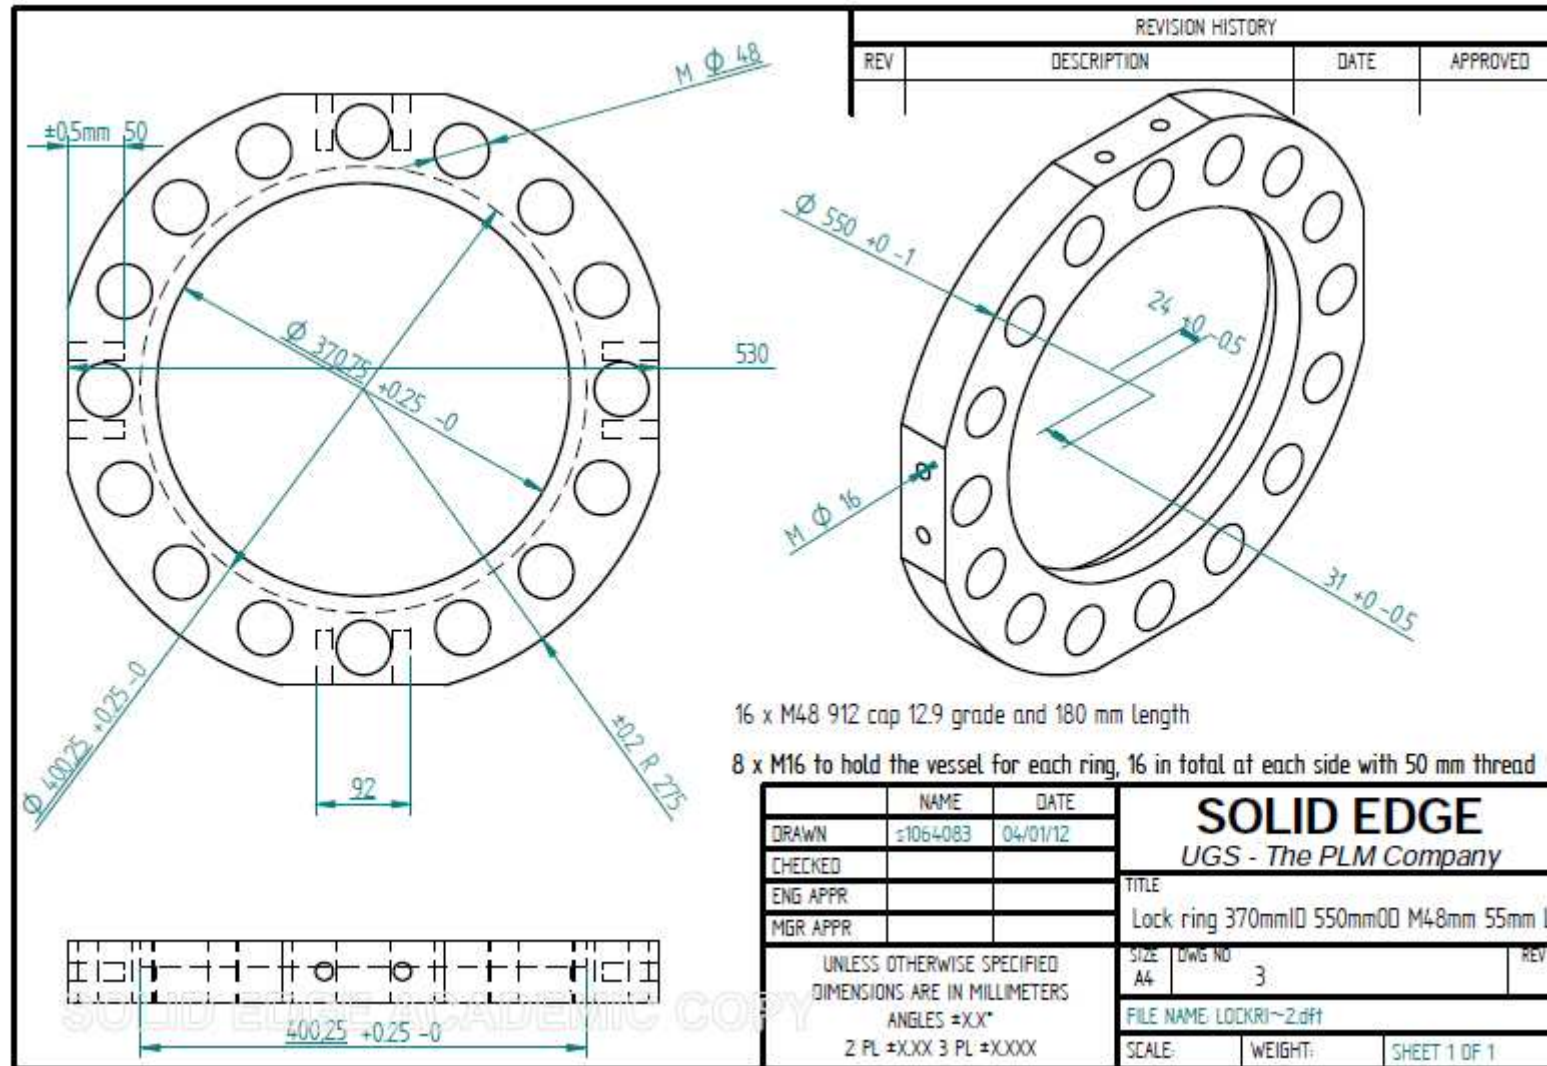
Drawing of Lock ring 370 mm ID, 550 mm OD M48 mm 55 mm L
